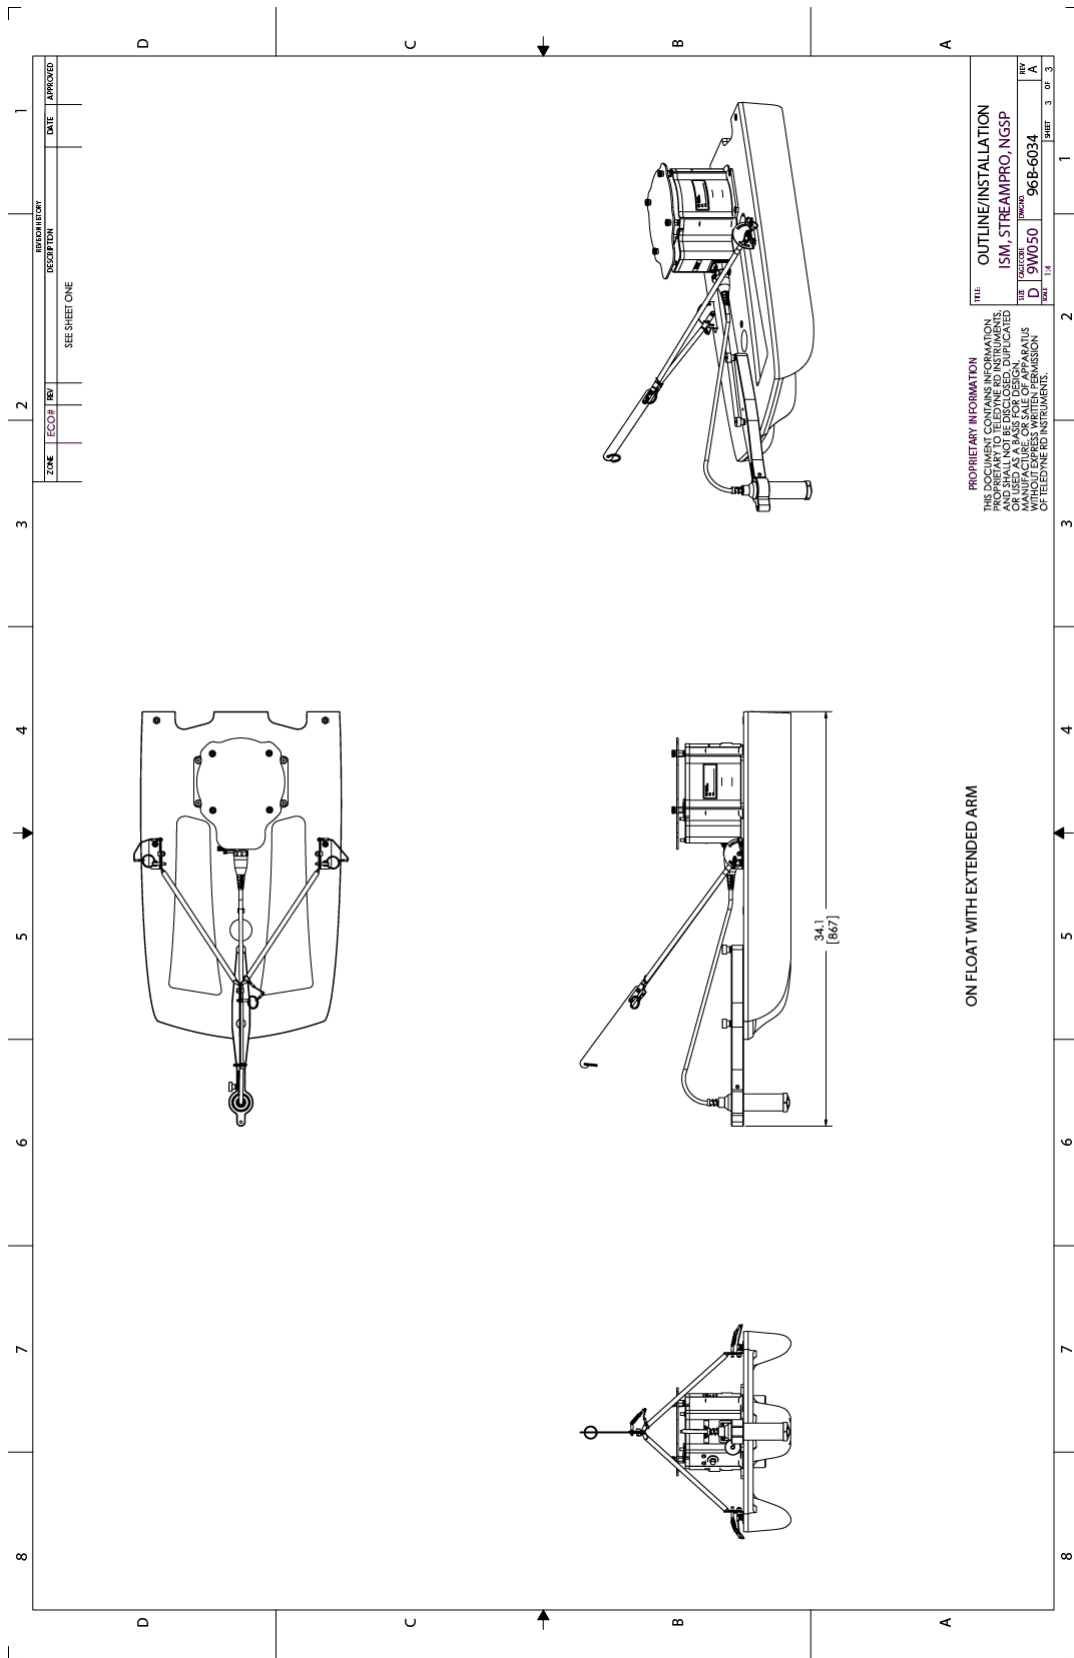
Outline Installation Drawing 96B-6034 – Sheet 3 of 3
